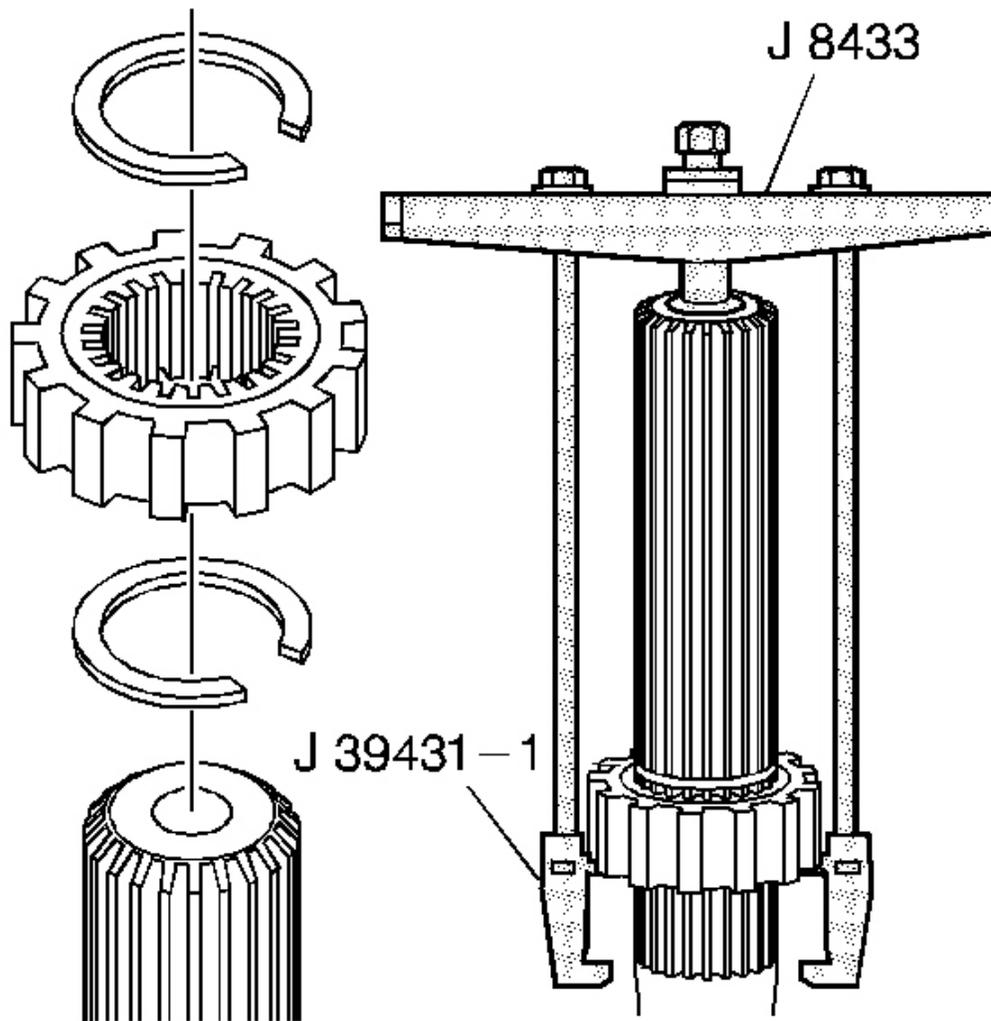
Locating Speed Sensor Reluctor Wheel & Retaining Ring
